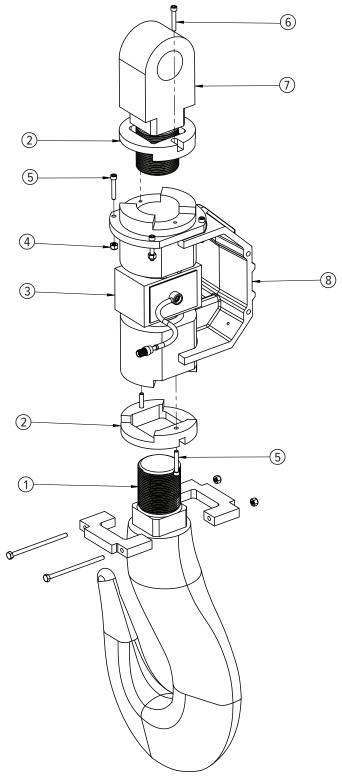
MSI-9600HT Mid-Section Assembly 10,000 lb
